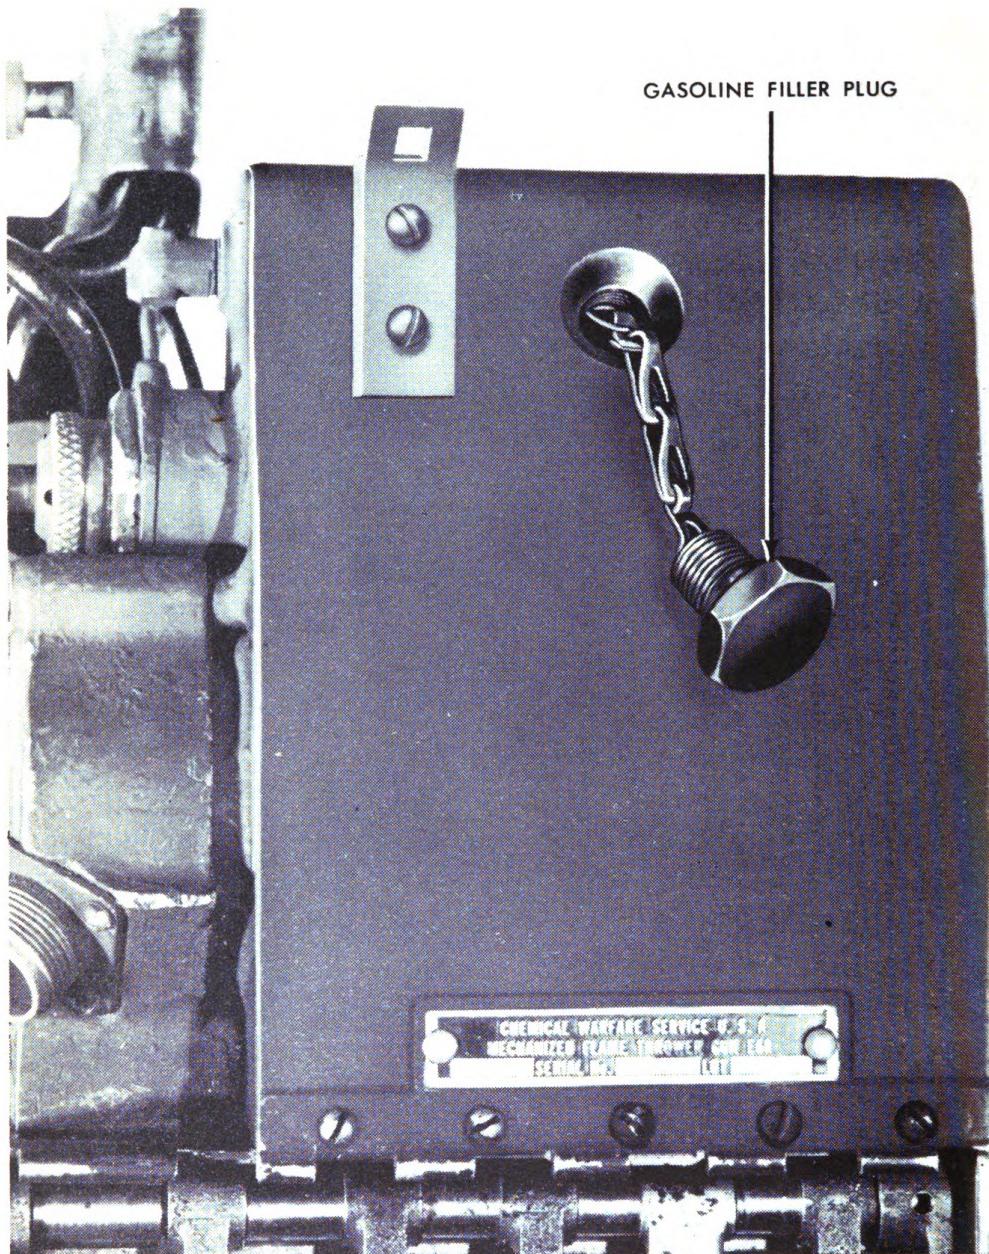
Gasoline filler plug unscrewed from gasoline reservoir.
